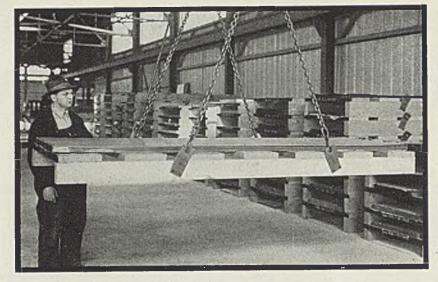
Closeup of sheet platform and lifting plates, left. Note in background how the platforms stack to form racks
